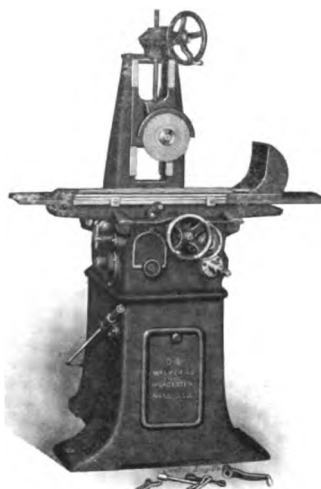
No. 1 1/2 Reciprocating Table Surface Grinding Machine
